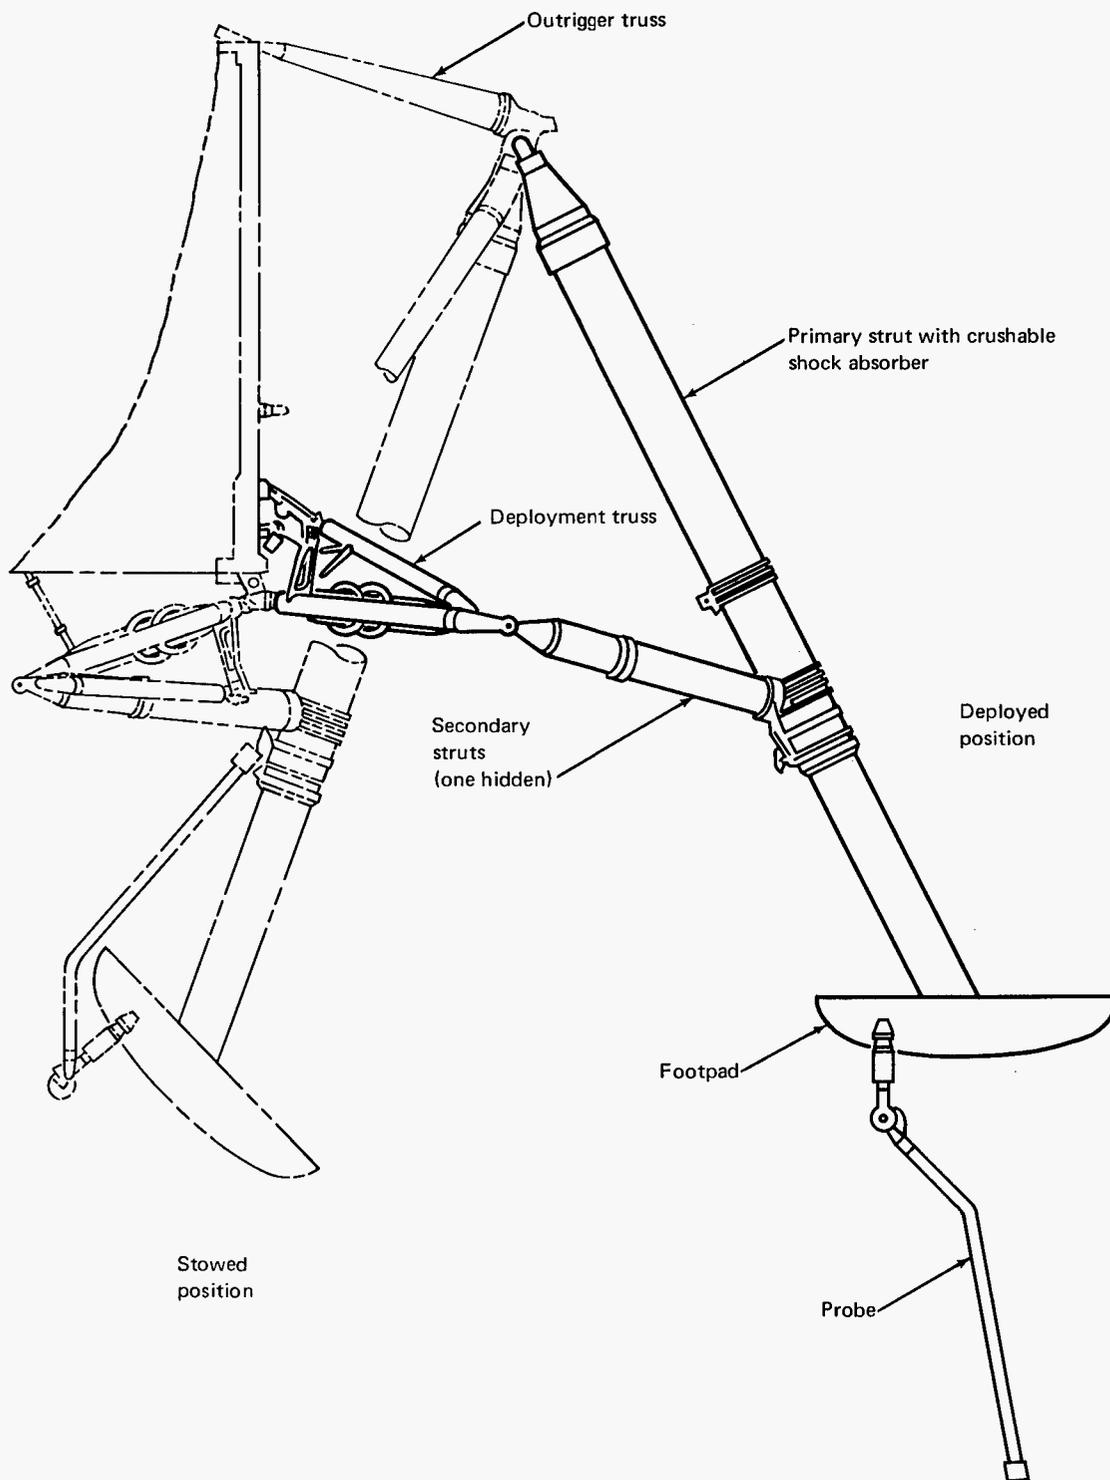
One-leg assembly of four-legged LM landing gear (stowed and deployed).
